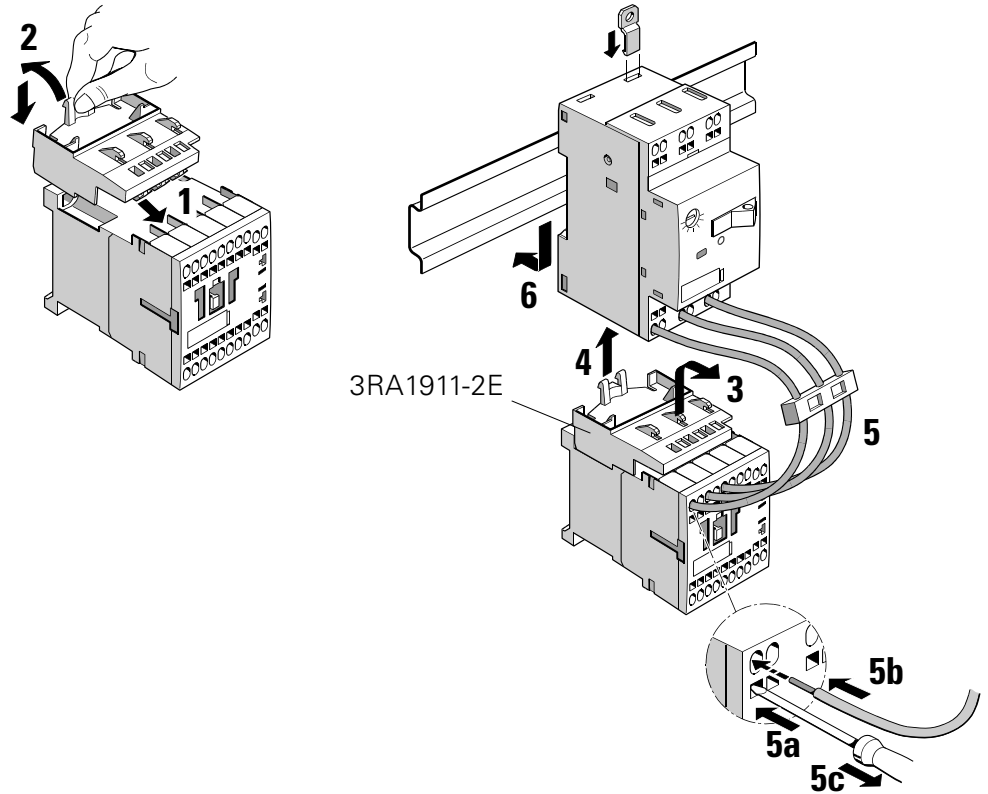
Self-assembly, rail, direct starter (frame size S00, Cage Clamp)
